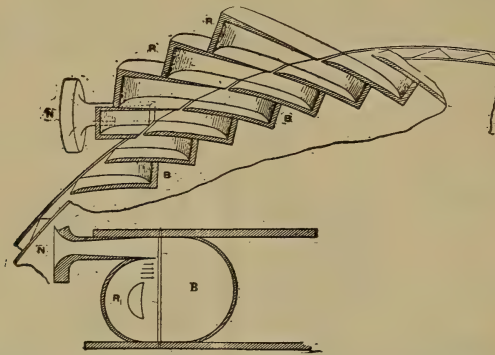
Arrangement of Buckets and Reversing Chambers in a Terry Steam Turbine.
